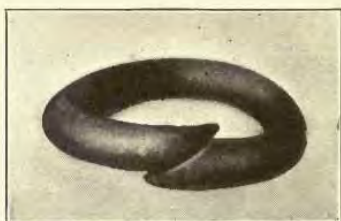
SHOWING SCARFS ON LAP WELD OF RING.
